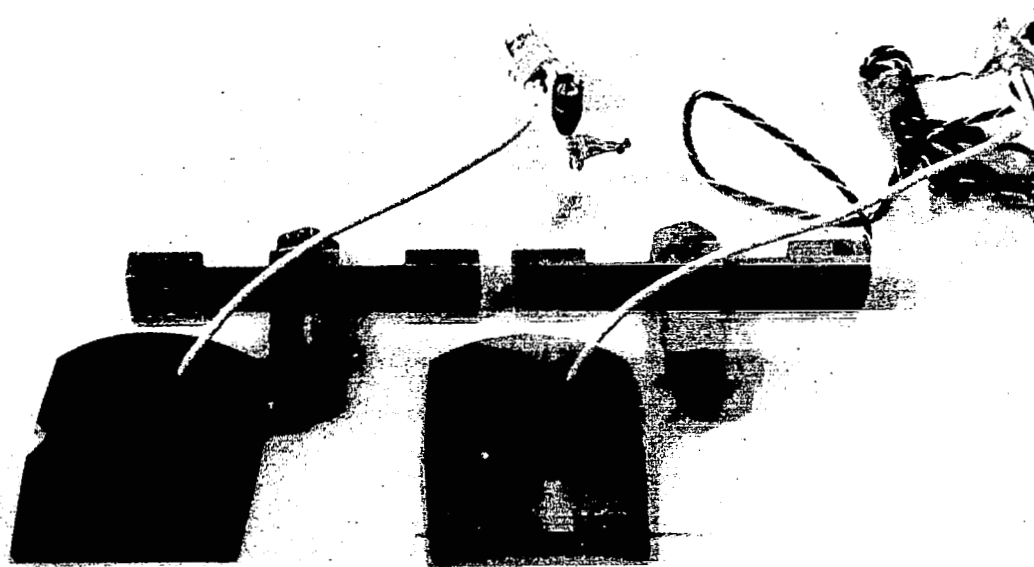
Turbine Journal Bearing Pads, Rear View with Pivots, Inspection 4
